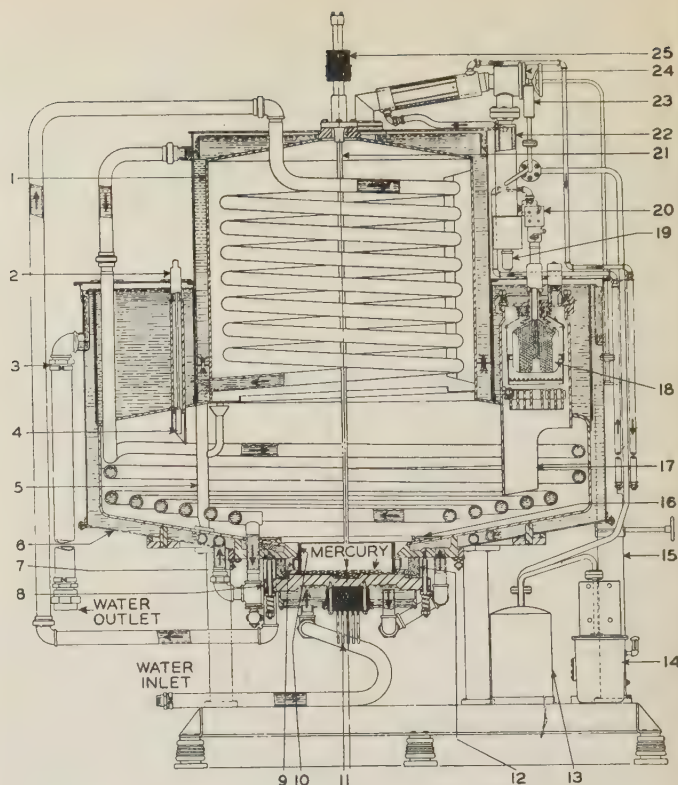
Cross-sectional view of 3,000-kw 625-volt rectifier
